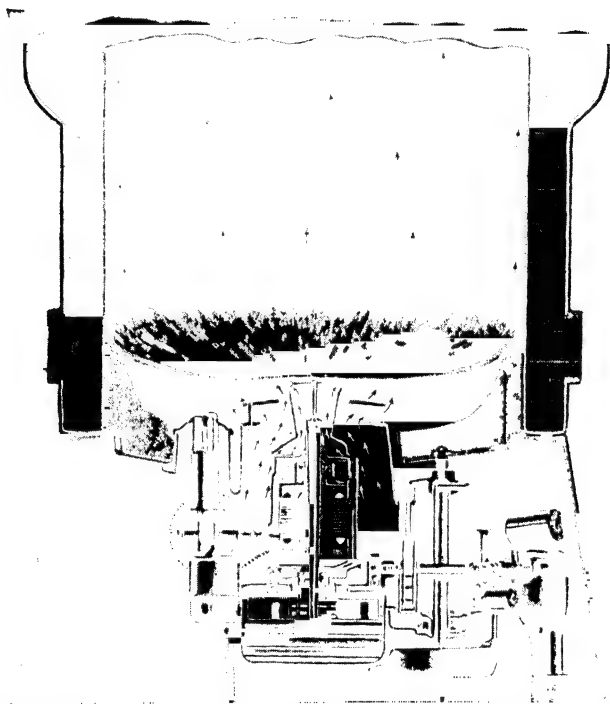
Vertical rotary-cup burner mounted in boiler. (Courtesy of Automatic Burner Corporation)
